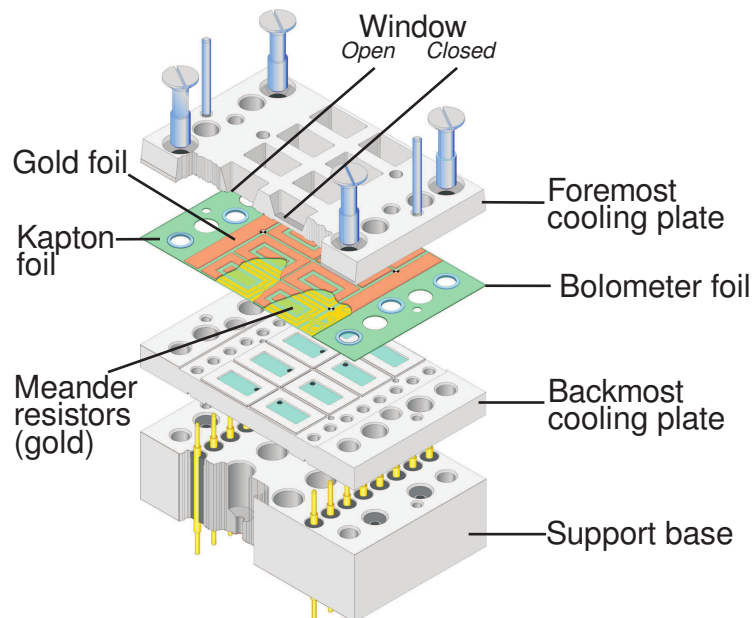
Detailed view of one of the bolometer heads [24].
